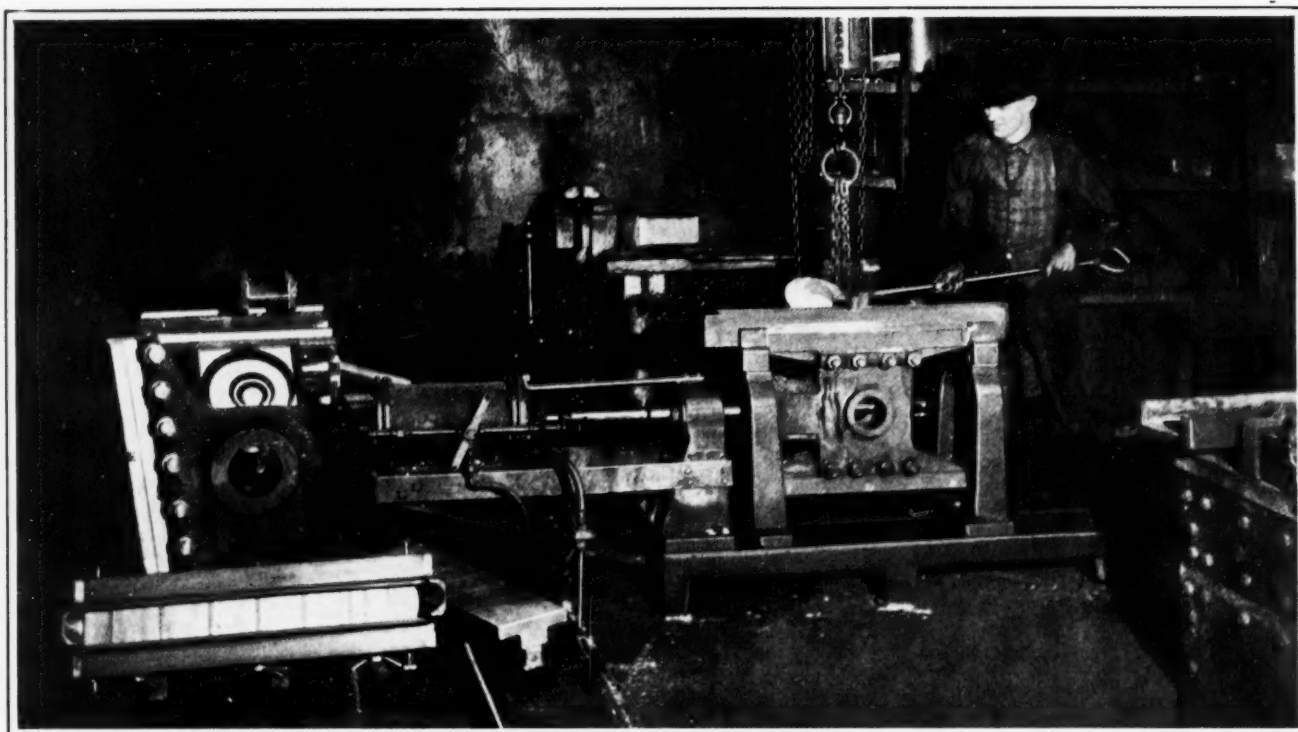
The Use of Jigs in Babbitting Locomotive Cross-heads, Cross-head Slippers and T-shaped Guides has Eliminated the Need of Machining the Babbitted Surfaces
